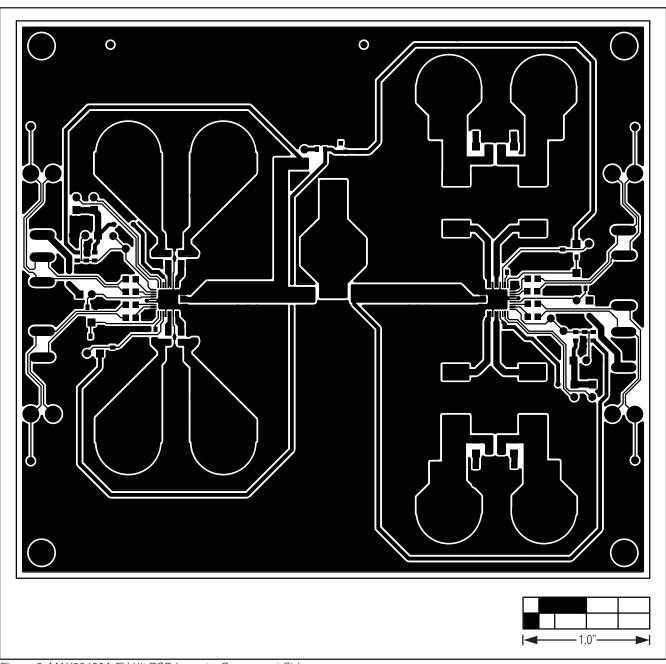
MAX98400A EV Kit PCB Layout—Component Side
